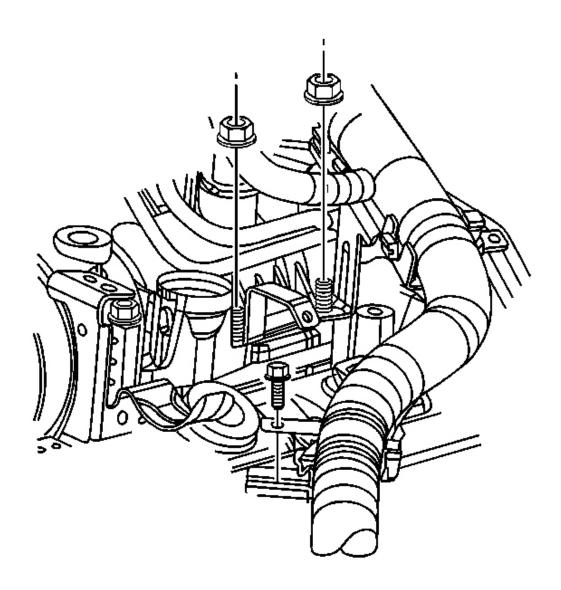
View Of Engine Wiring Harness Bracket & Nuts Courtesy of GENERAL MOTORS CORP.
